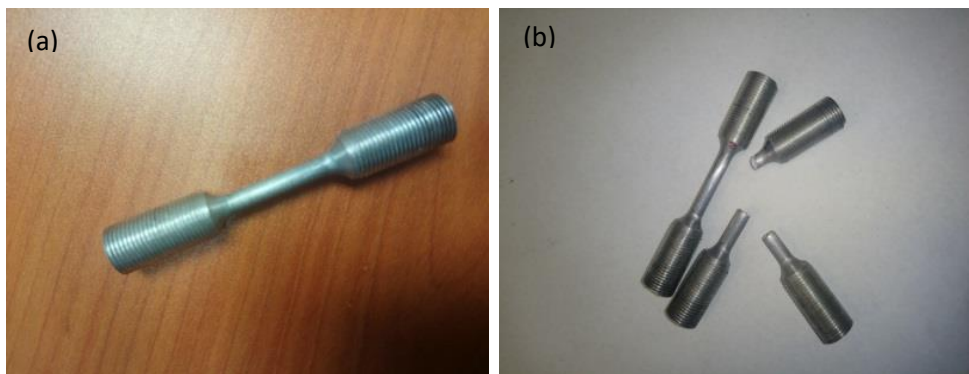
(a) Dog-bone sample used for axial fatigue tests (b) Fractured fatigue samples after testing.
